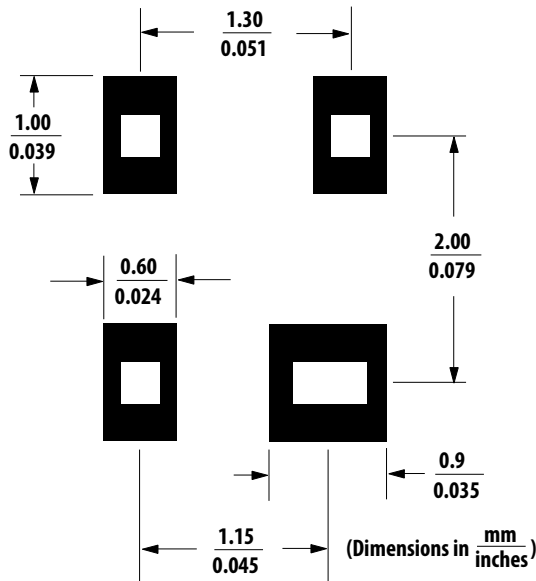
PCB Pad Layout for ADA-4643. Package dimensions in mm/inches.
